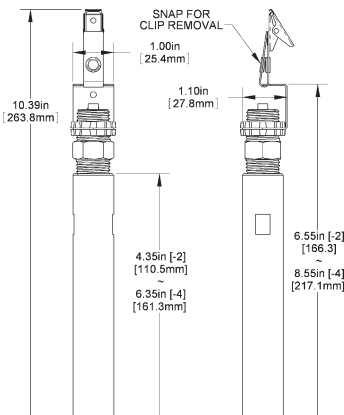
Hanging Bracket, 2" & 4" Buffer w/SS Threaded Fitting
